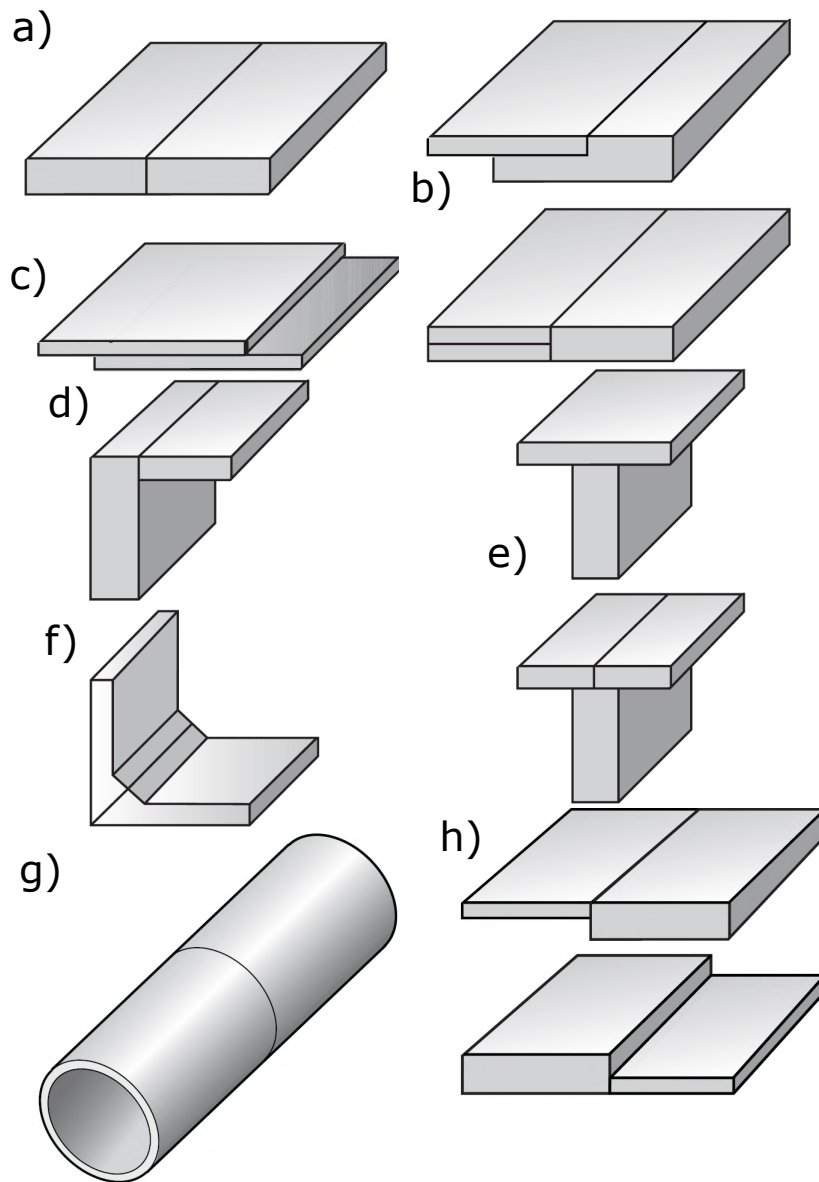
Unwelded FSW configurations: (a) Butt joint (b) Half overlap joint (c) Lap joint (d) Corner joint (e) T-joint (f) Fillet joint (g) Circumferential butt joint (h) Different thicknesses butt joint [26].
